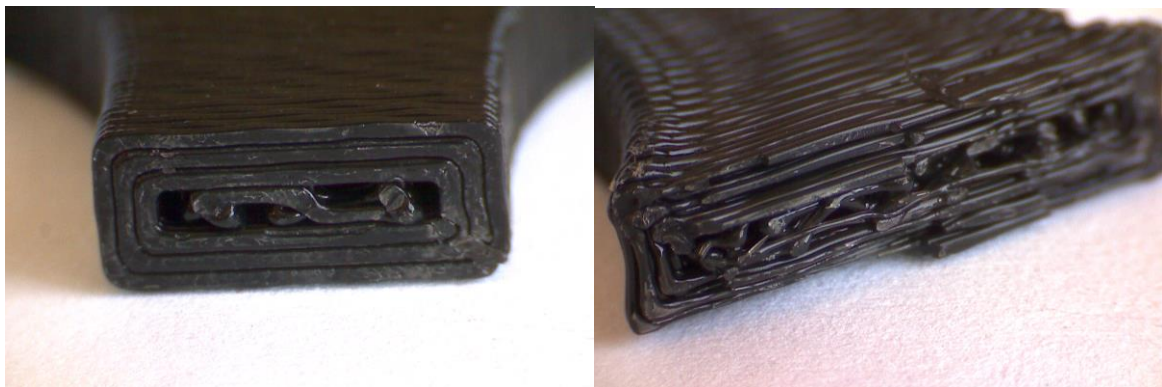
Specimen fractures with printing speed 10 mm/sec to the left and 130 mm/sec to the right
